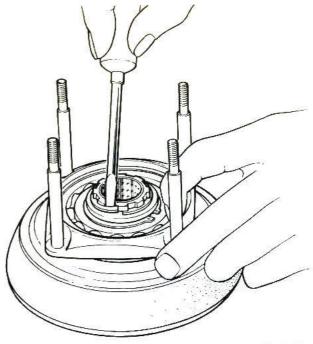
REMOVING SUNWHEEL CIRCLIP
